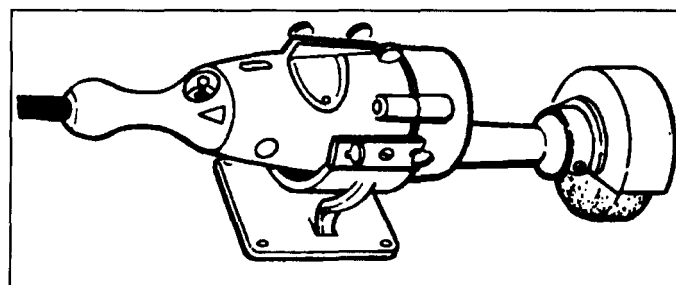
Portable electric grinder (wheel type) with grinder stand.
